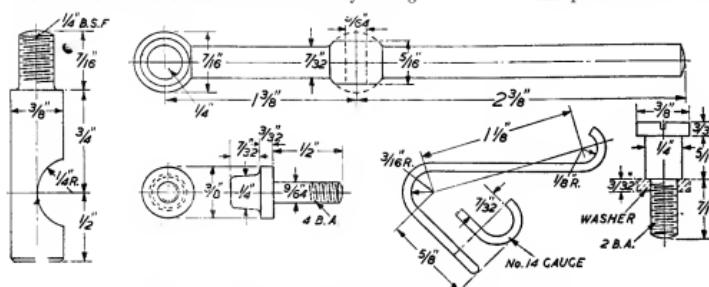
Details of tool holder drawbolt (six off), unlocking lever, locking pin, spring and pivot screw (1 off each).
